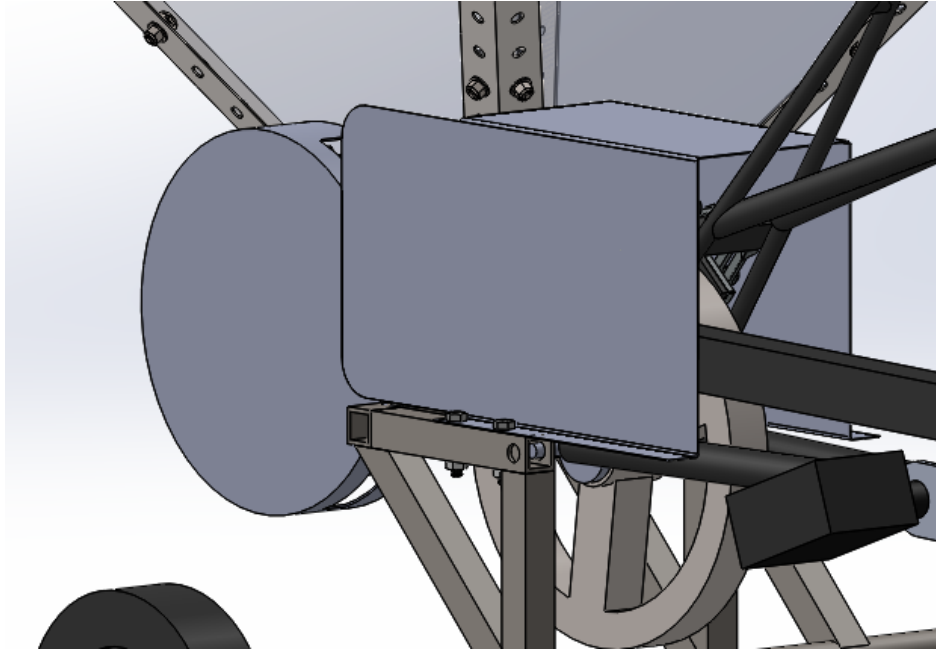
Sheet Metal Safety Shielding for The Rear Drive Train
